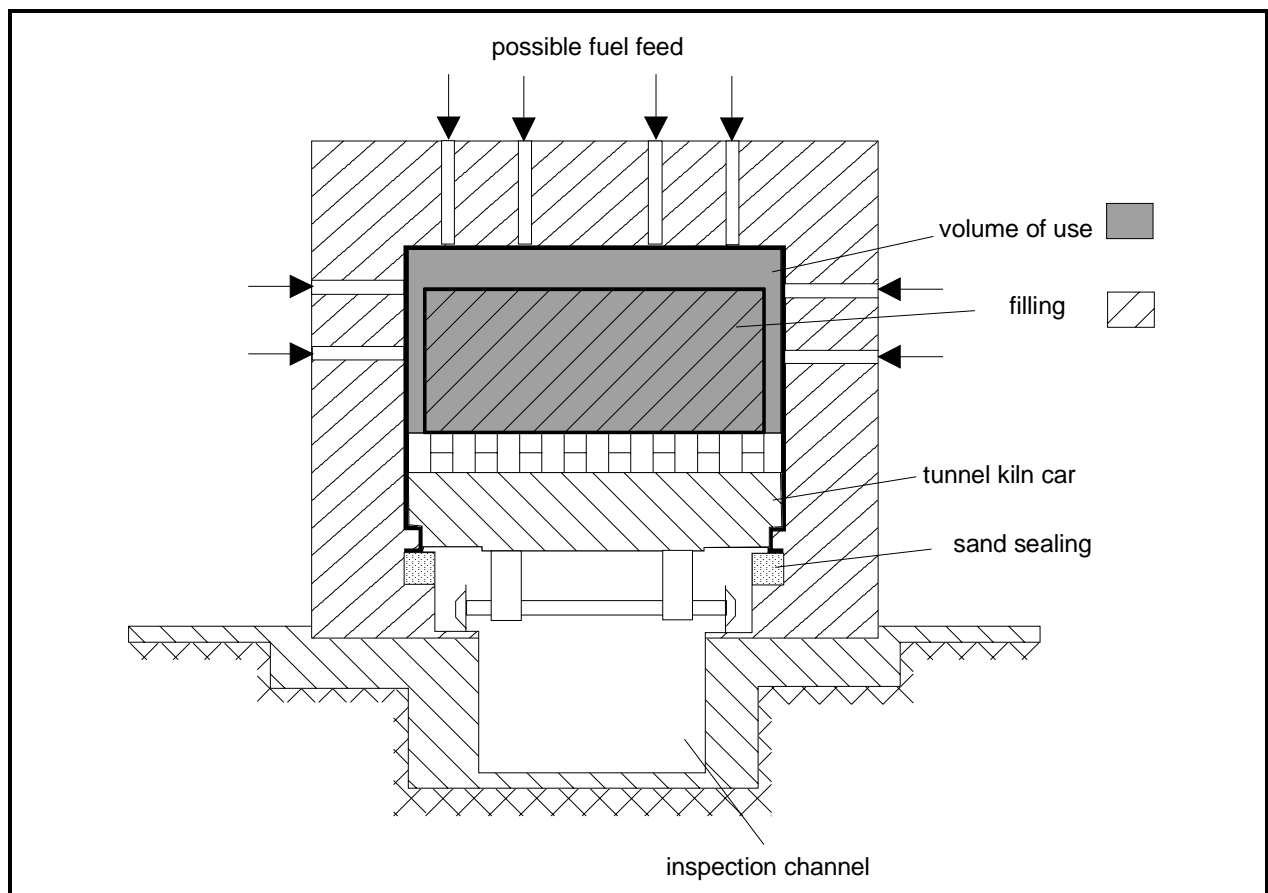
Cross-section of a tunnel kiln with a tunnel kiln car
